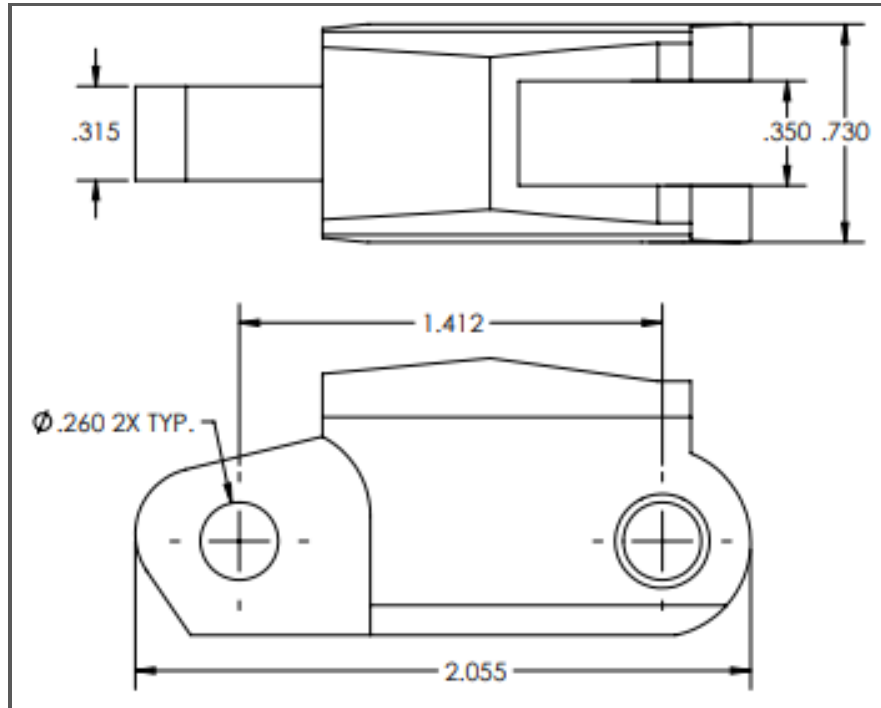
Solidworks drawing highlighting the critical dimensions of the new part that was later 3D printed. These dimensions correspond with those on the existing parts.
